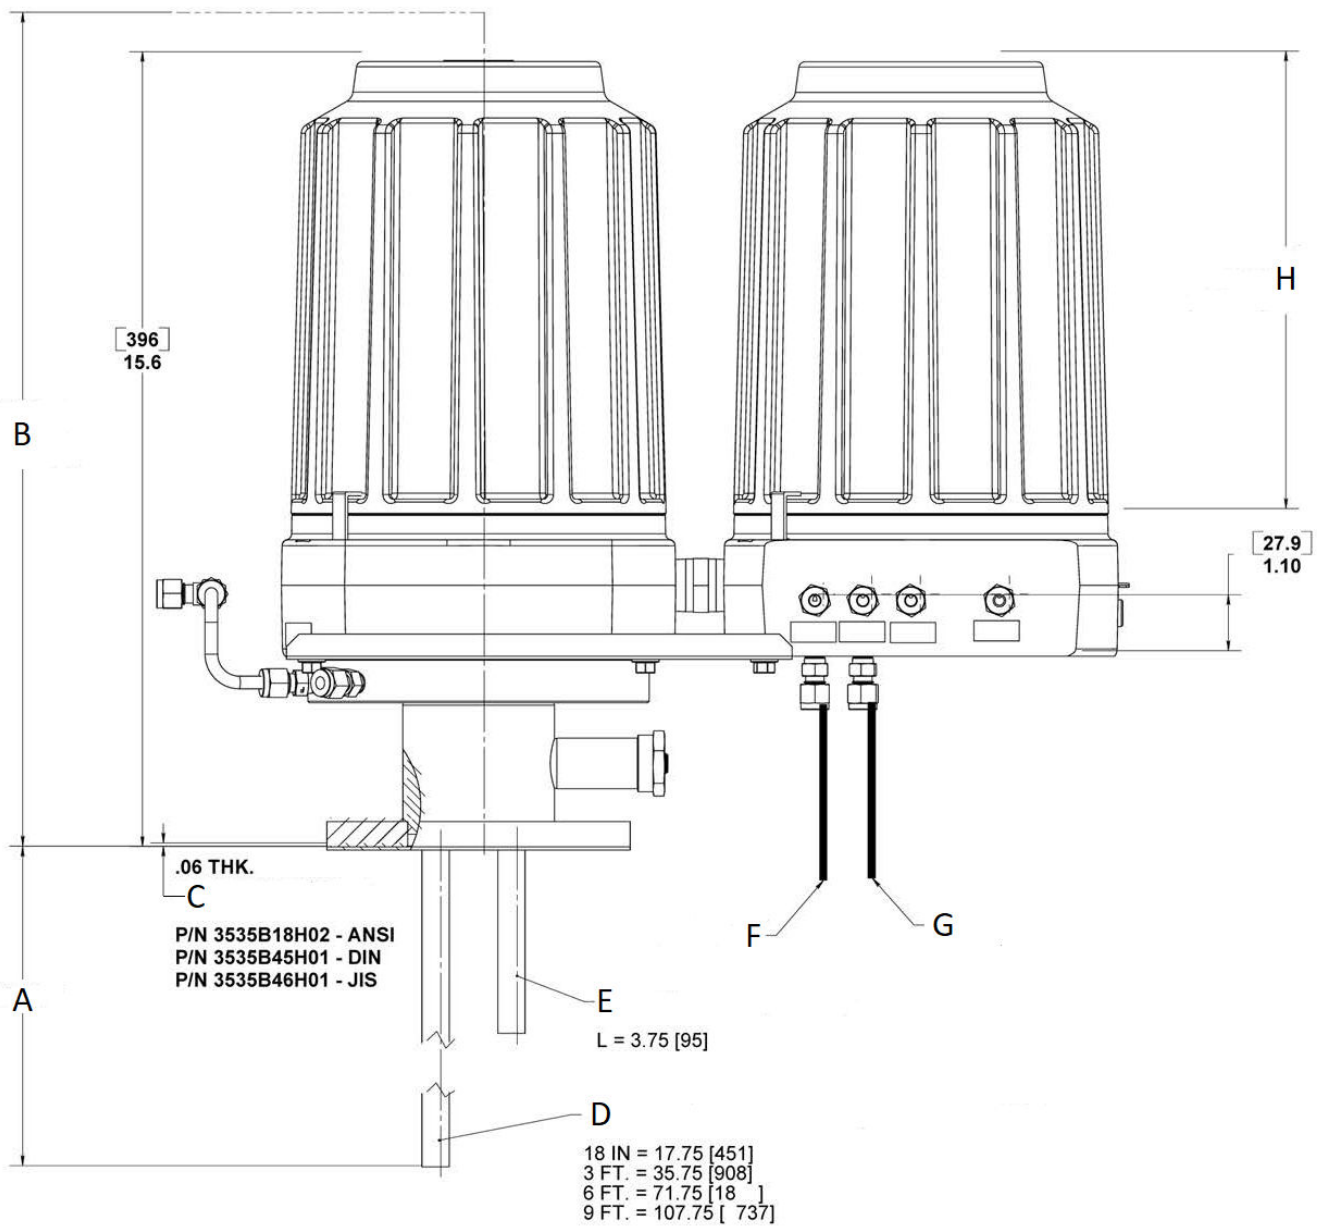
Outline dimensions for Rosemount OCX8800 Oxygen/Combustible Transmitter with integral electronics
